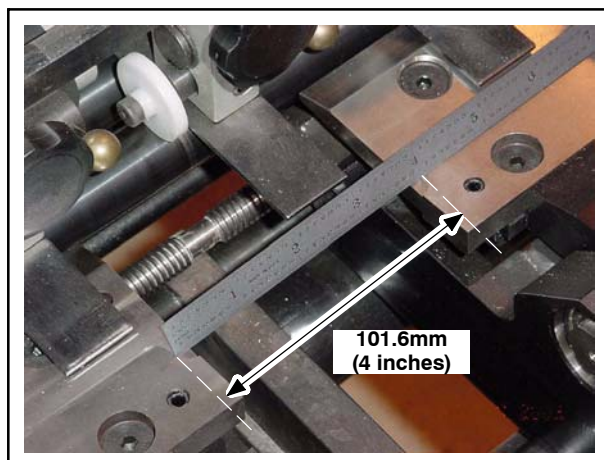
Adjust Knife Package to Achieve 4.0" Dimension
